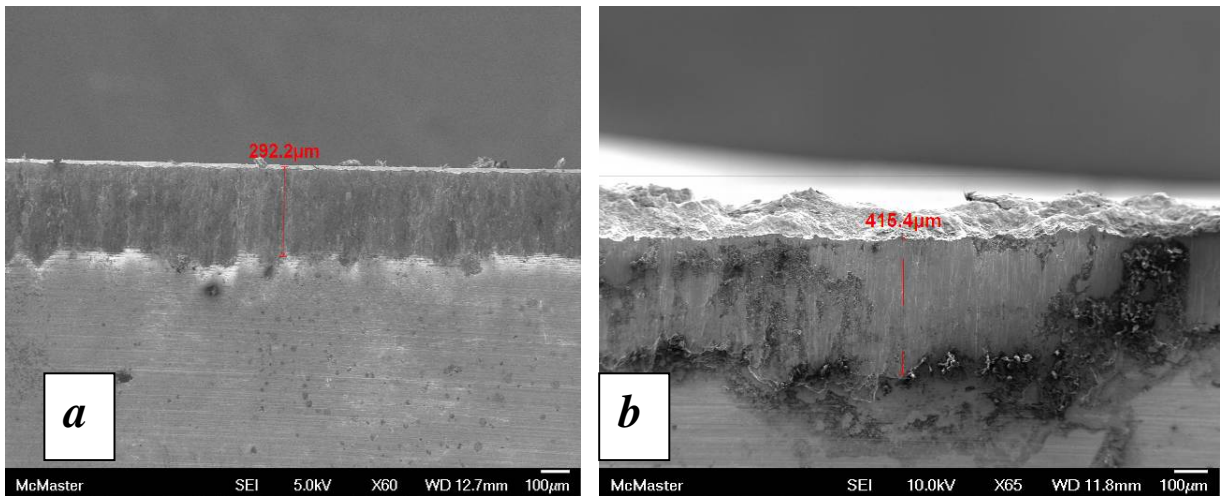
Cutting insert images showing the effect of lowest cutting forces 0.05 mm/rev-400 m/min. (a), highest cutting forces 0.2 mm/rev.-100 m/min. (b) on the tool wear type
